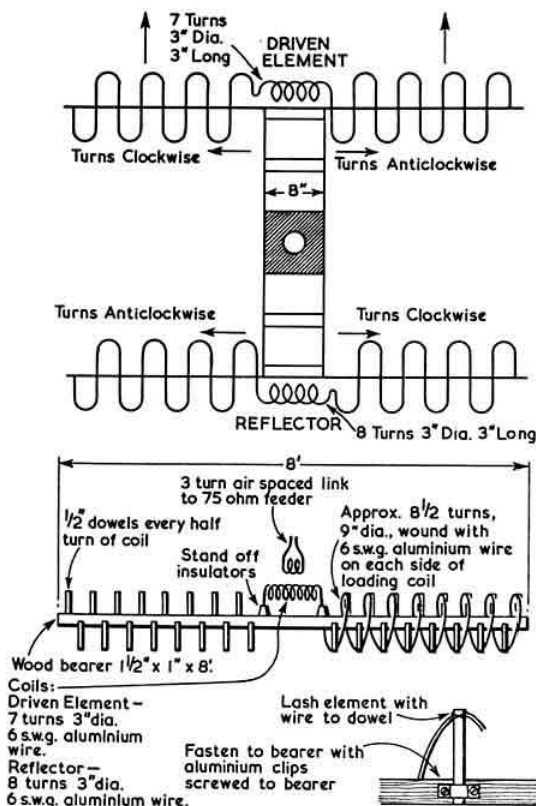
Constructional details of the "Screwball" miniature 14 Mc/s beam.
